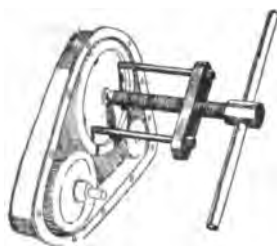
in removing the camshaft or crankshaft gear two carriage bolts which are part of the puller are screwed into tapped holes in the web of the gear
